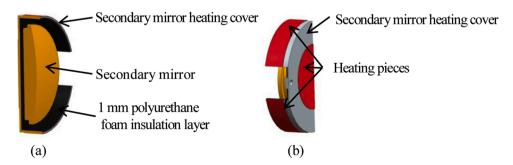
(a) secondary mirror heating cover and insulation layer (b) heating pieces on secondary mirror heating cover.
